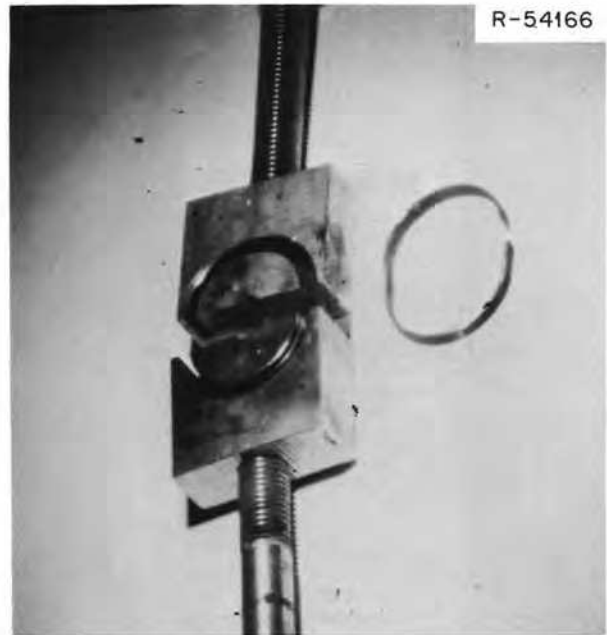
Fixture used for pulling Hastelloy N rings cut from the control rod thimble.
